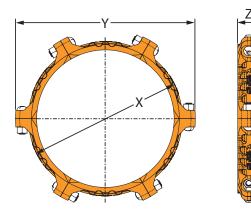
WELD RING GRUV-RING COUPLING
